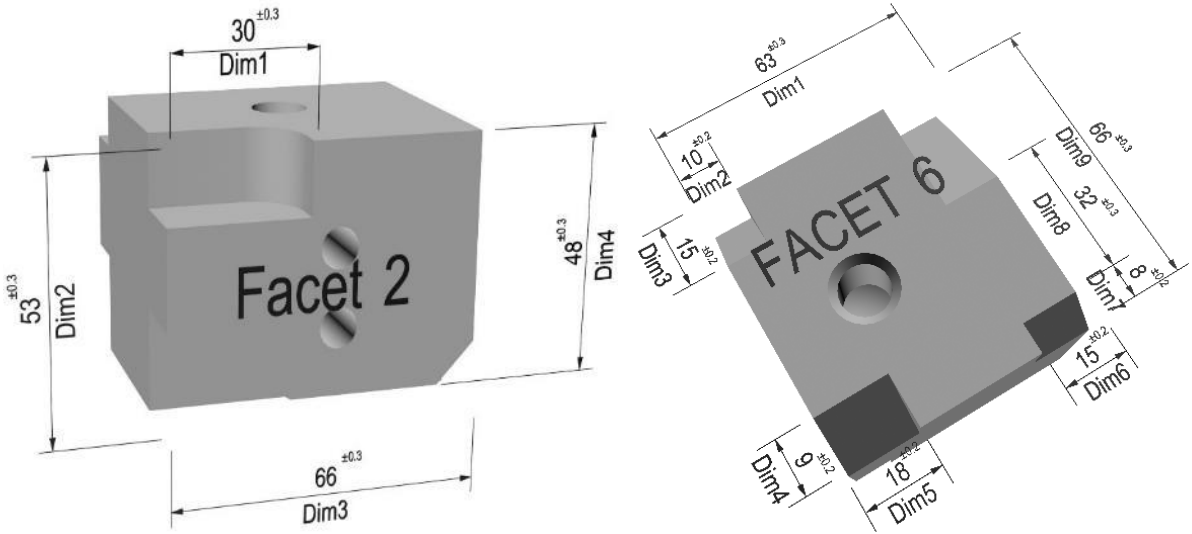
The dimension values and their tolerances of two facets of the workpiece
